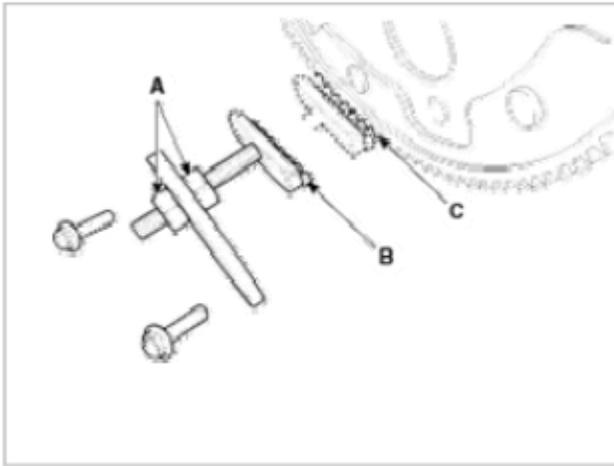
Locating Holder Nuts, Front Plate Holder And Ring Gear
